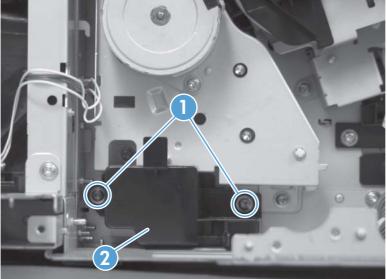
Remove the cassette pickup drive assembly (7 of 10)
